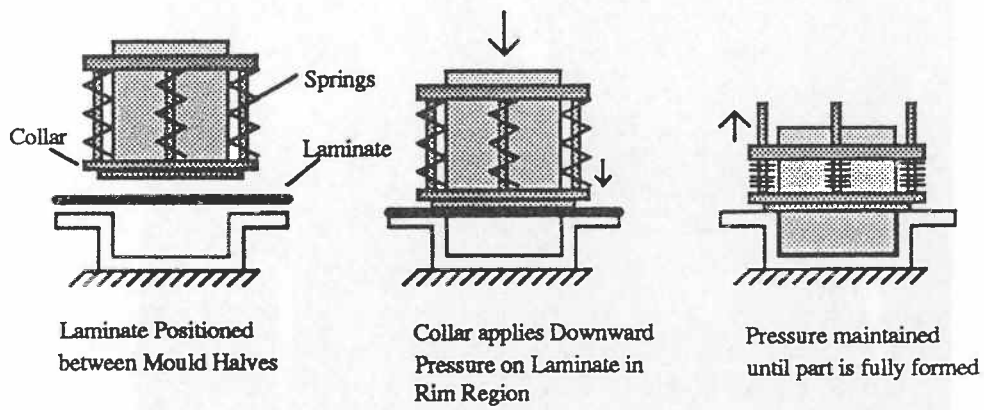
Operating Principle of Cylindrical Dish Clamping and Tensioning Mechanism
